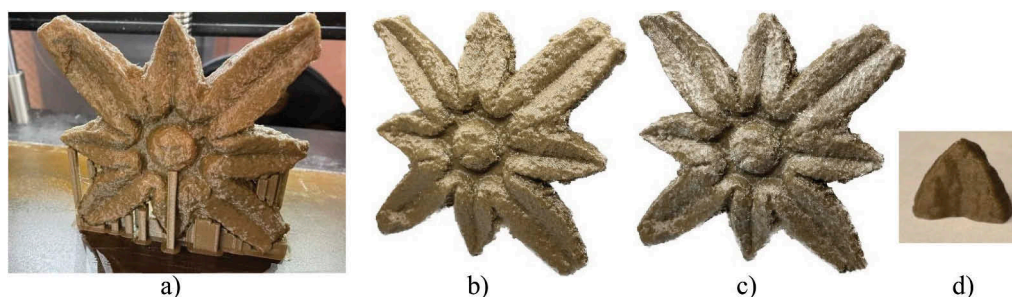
General view of printed star: a – printed star replica with supports, b – replica with supports removed, c – replica after machining, d – tip created by printing with a metal-filled filament.
